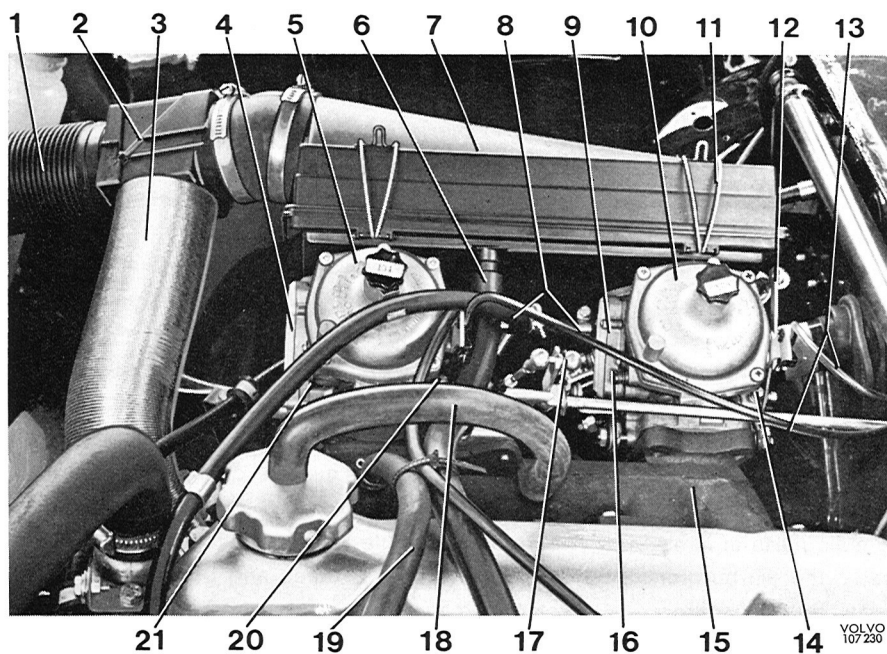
Stromberg carburetors on B 20 B (r-h drive)
